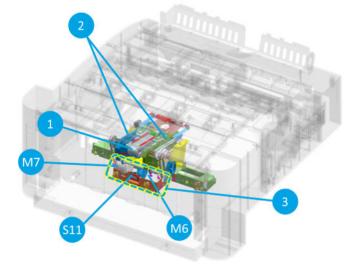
Inner finisher system - ejector unit detail view (1/3)
